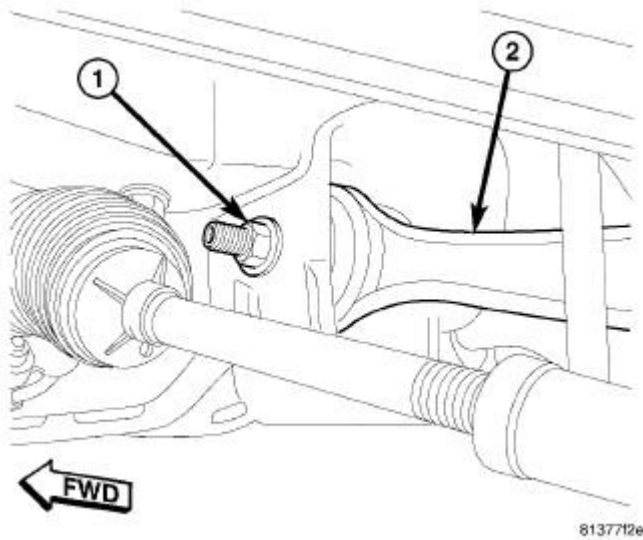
CONTROL ARM CRADLE BOLT NUT
